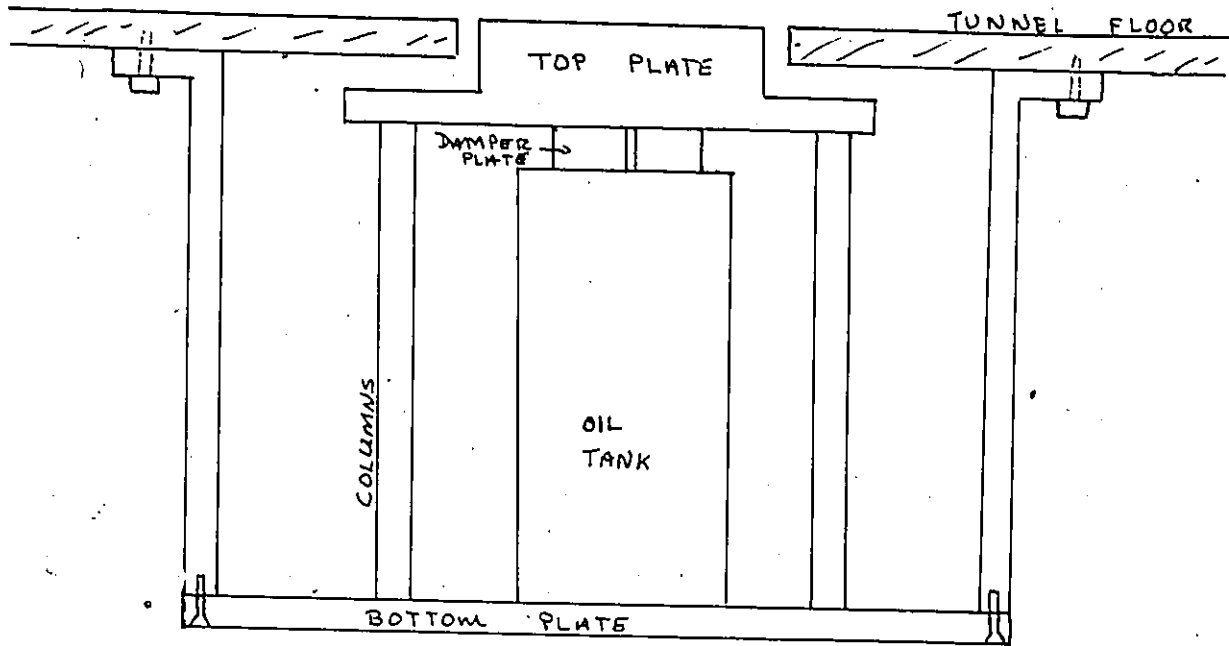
SKETCH OF ASSEMBLY
